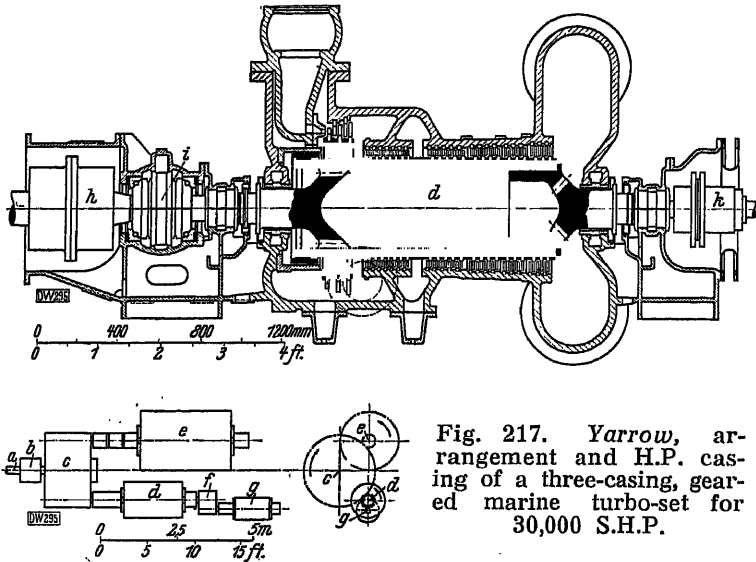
Yarrow, arrangement and H.P. casing of a three-casing, geared marine turbo-set for 30,000 S.H.P.
